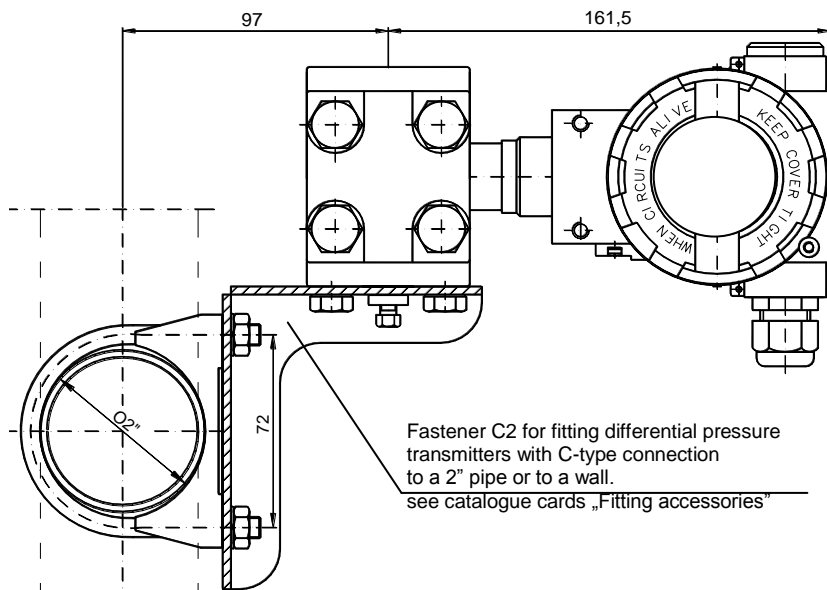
Example: how to install the DPR-2000ALW transmitter on a vertical or horizontal pipe.
